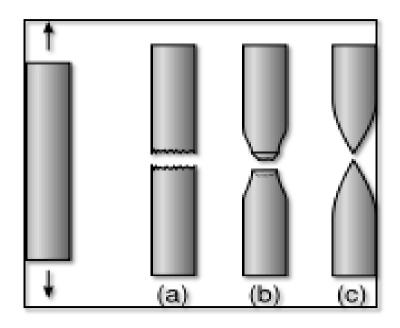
Schematic appearance of round metal bars after tensile testing. (a) Brittle fracture (b) Ductile fracture (c) Completely ductile fracture
